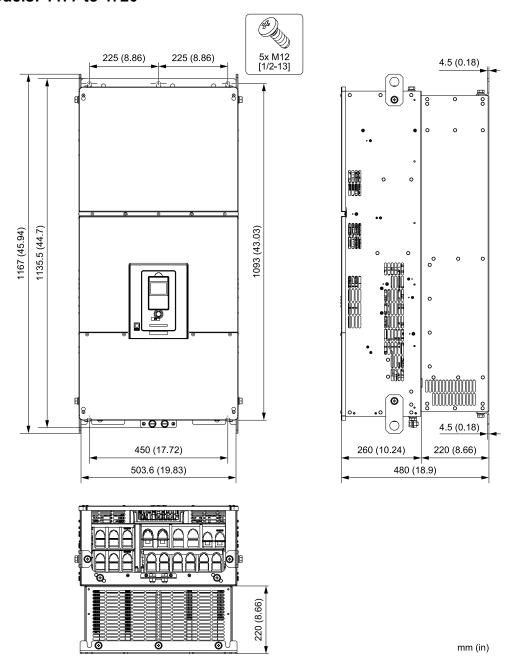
Exterior and Mounting Dimensions Diagram 3
